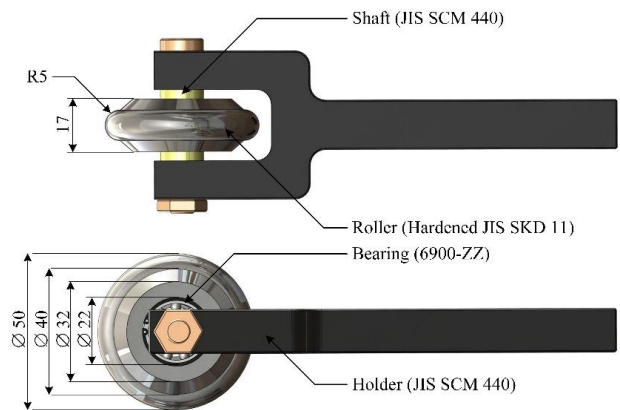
Schematic of the roller burnishing tool used in this study, showing the roller, holder, bearing, and shaft assembly (all dimensions in mm).
